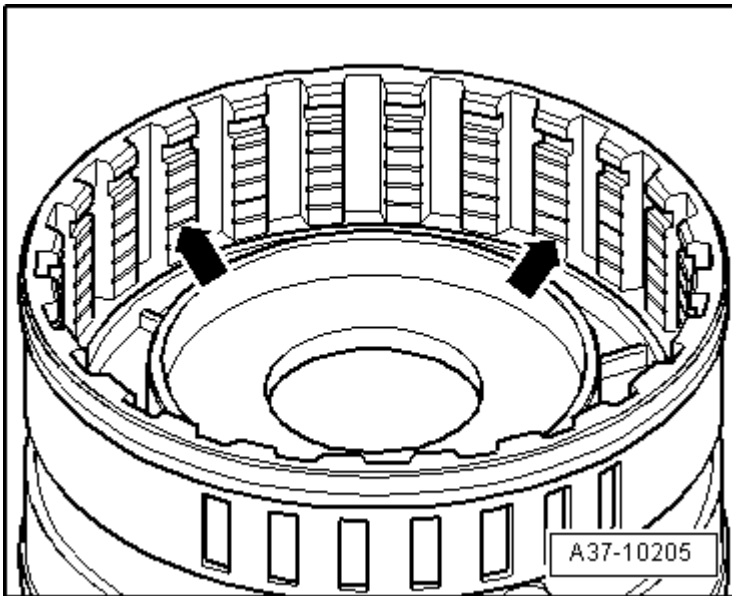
Signs Of Wear At Cylinder "F" Caused By Coated Plate
